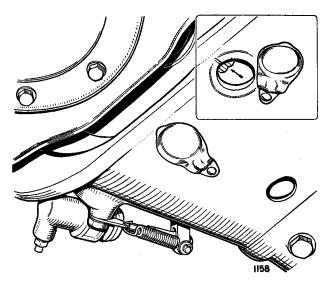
Top dead centre marks at the bottom of the clutch housing.
